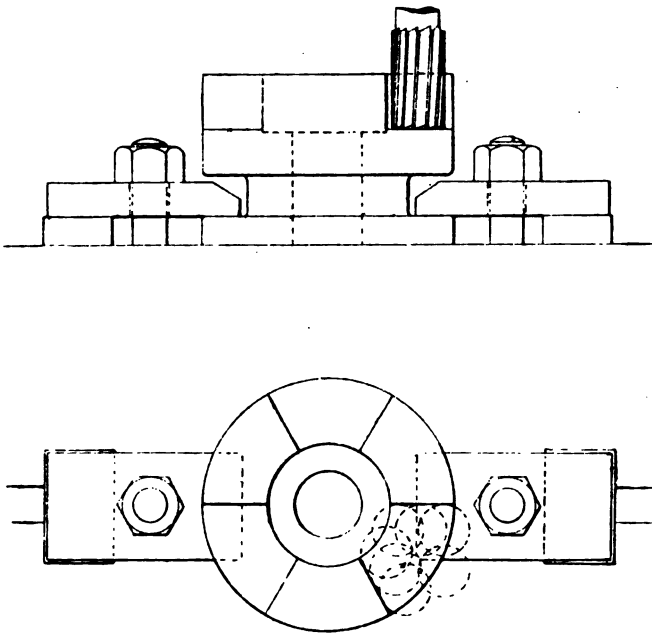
End Mill operating on Claw Clutch clamped by its Collar.
